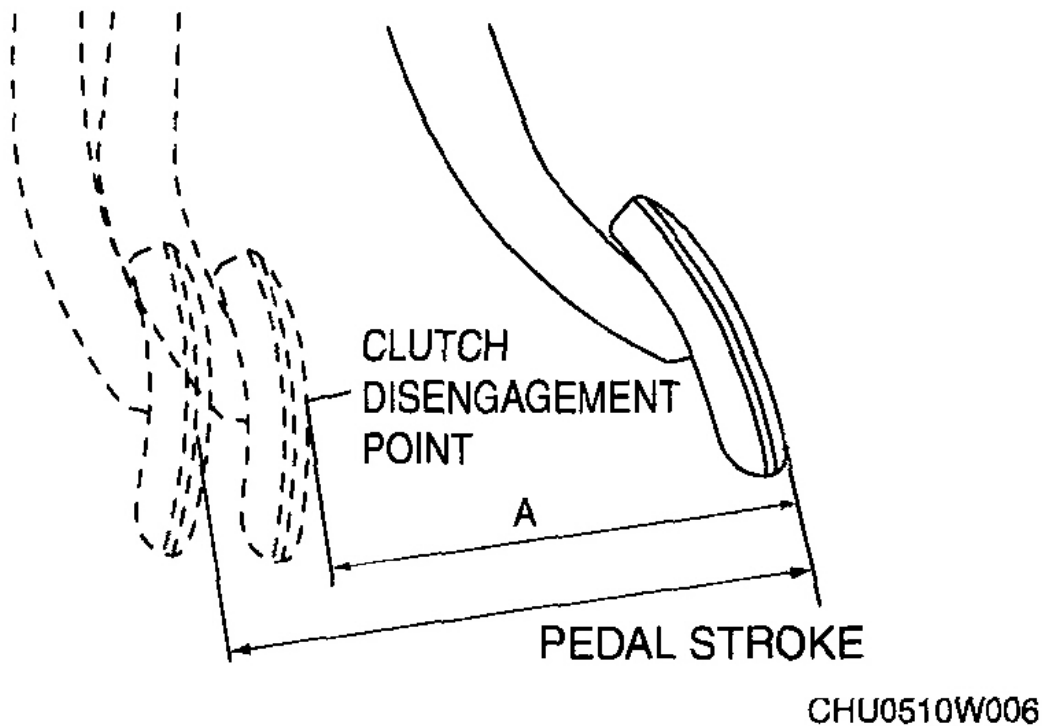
Inspecting Clutch Pedal Play (With Torque Specifications)
